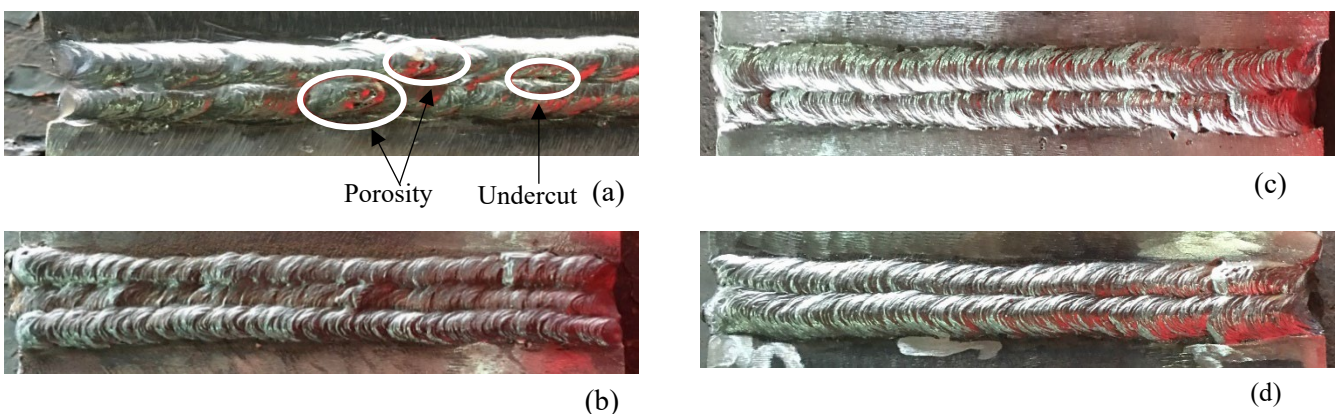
Pattern of Weld Seam after welding for specimens welded with (a) 65A; (b) 70 A; (c) 80 A and; (d) 90 A
